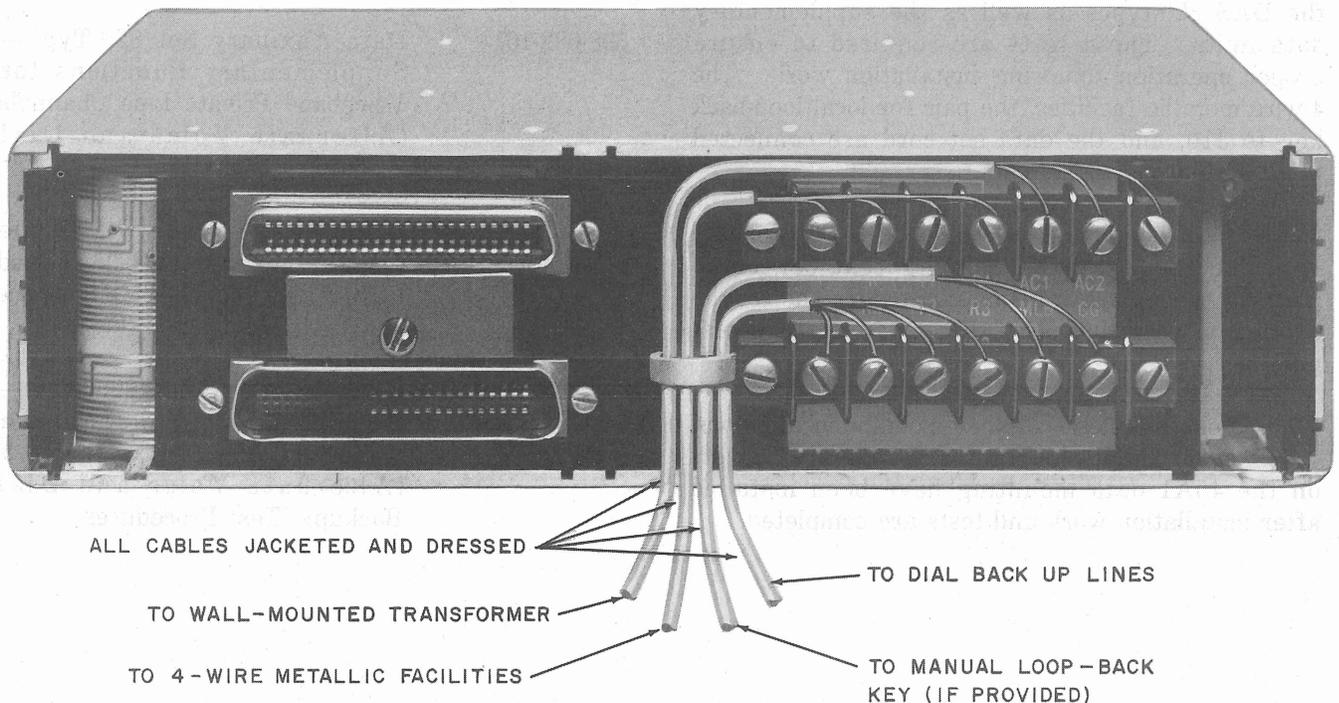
Rear View of 45A1 Data Mounting Showing Dress of Cable Connections
